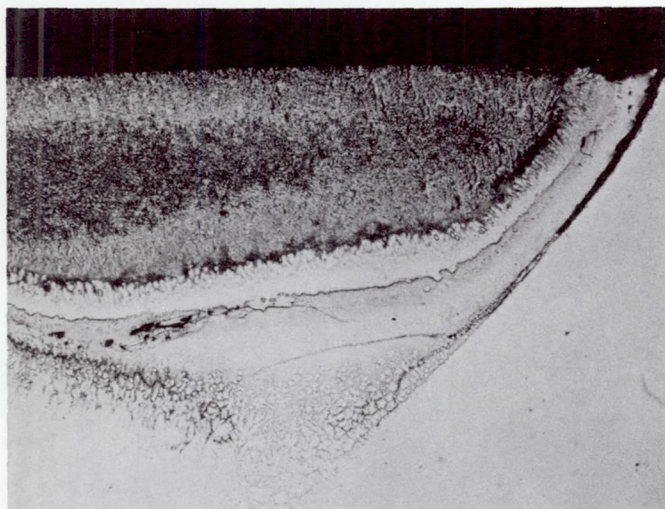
Structures of AZ92A wire/A1 2219-T87 plate, dc weld
